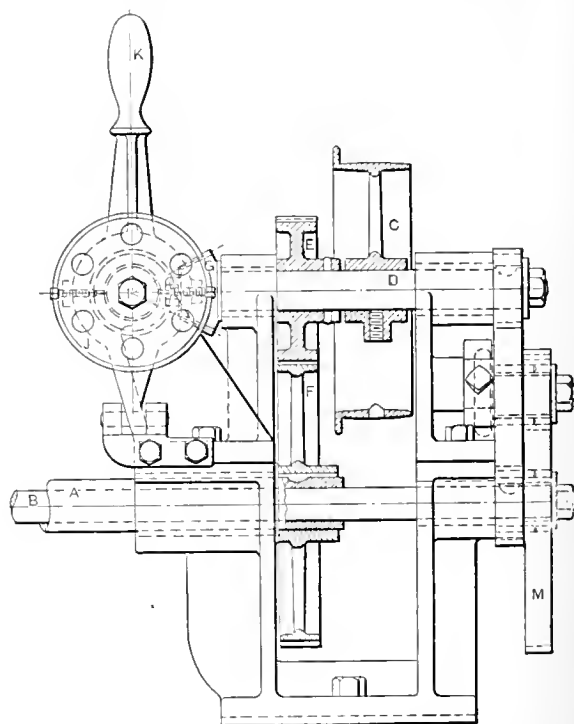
The Spindle and Cam Shaft Driving Mechanism, Operated by a Single Belt.
